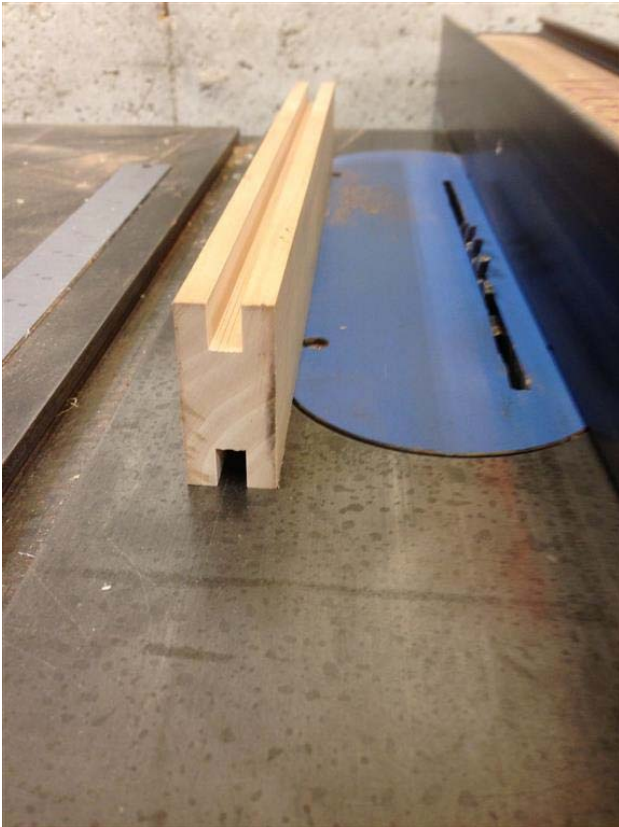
I cut 3/8" deep slots centered in each side of the board. The slots were about 1/4" wide. I was still able to measure and cut the Segment Edge Length of 1.072" at the bottom of the outside slot.
